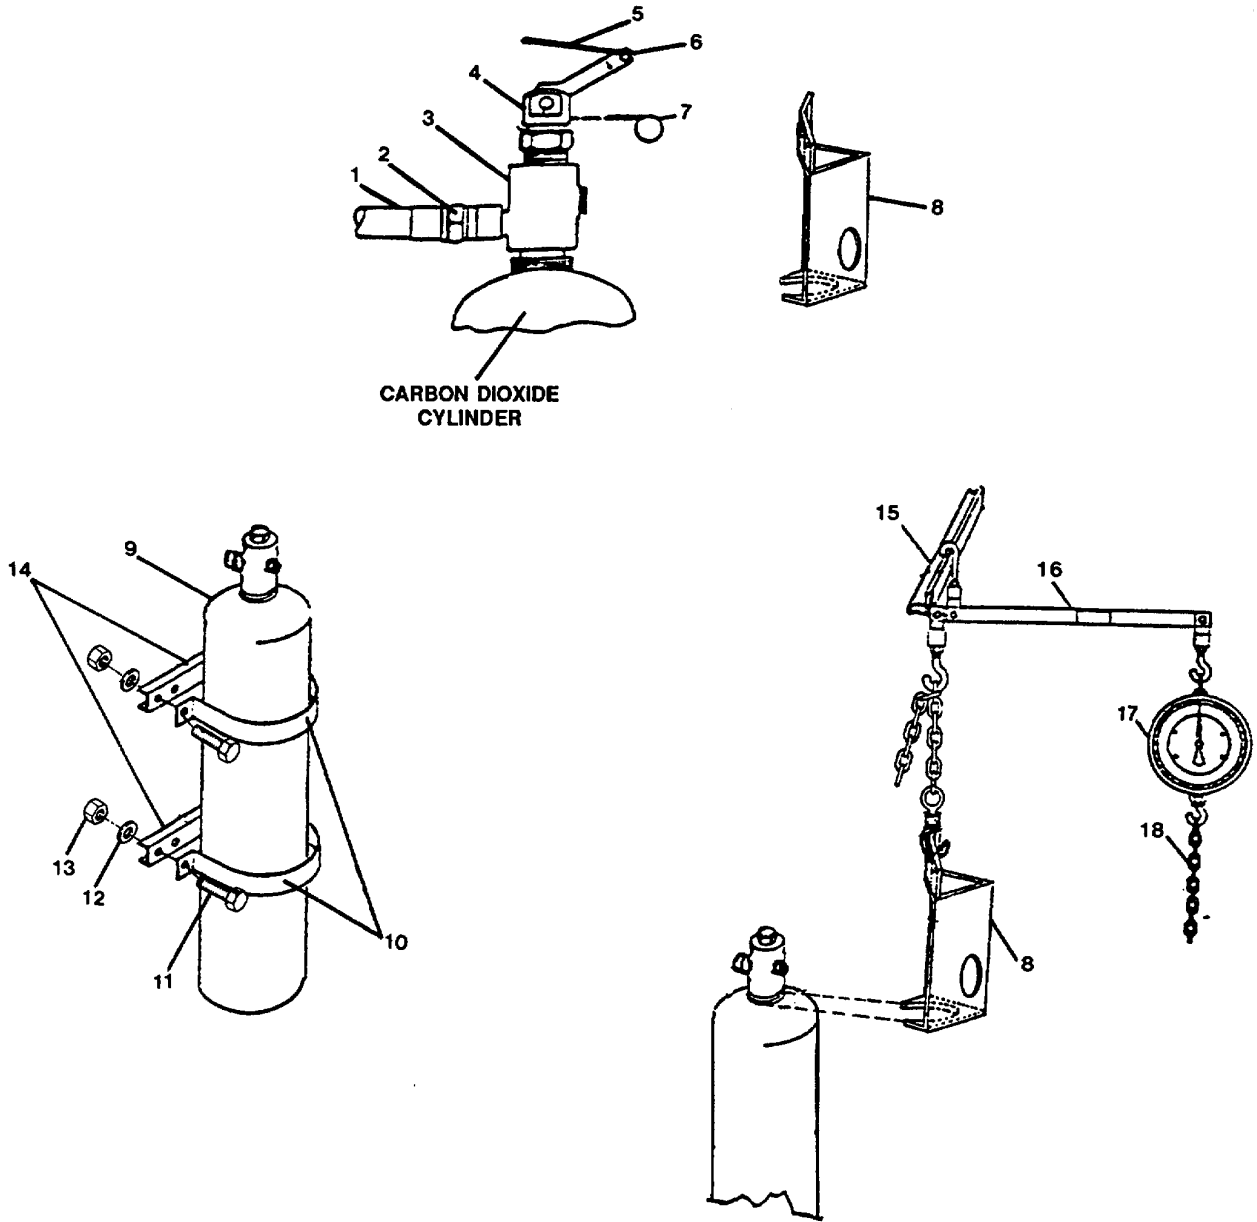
Carbon Dioxide Cylinders (Paint Locker and Main Machinery Room).
